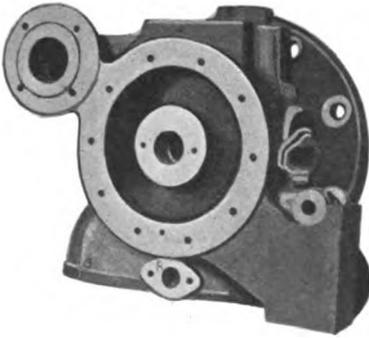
Breech end Casting of Schmitz Engine.
